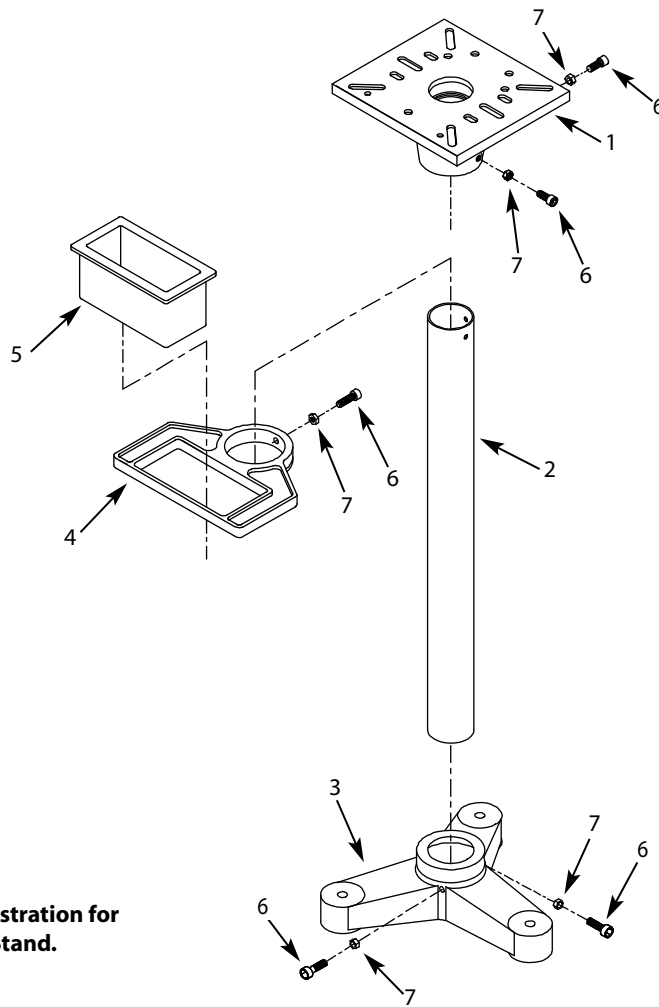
Repair parts illustration for Bench Grinder Stand.
